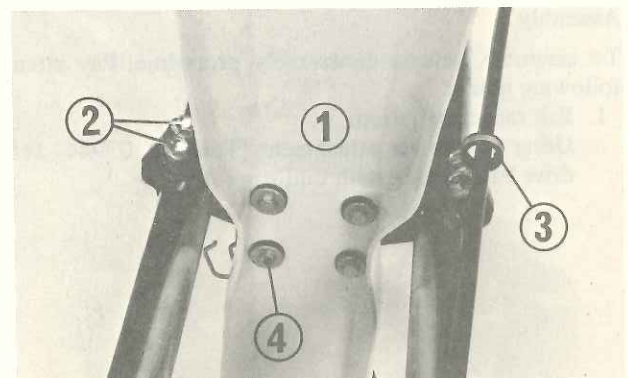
(1) Front fender (2) Lower front fork tightening bolts (3) Brake cable lower guide (4) 10 mm bolts
